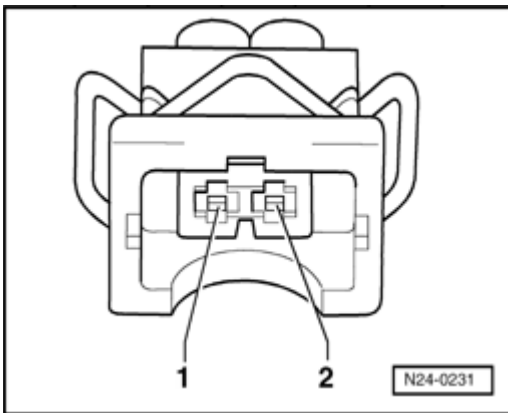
2-Pin Electrical Harness Connector & Terminals
